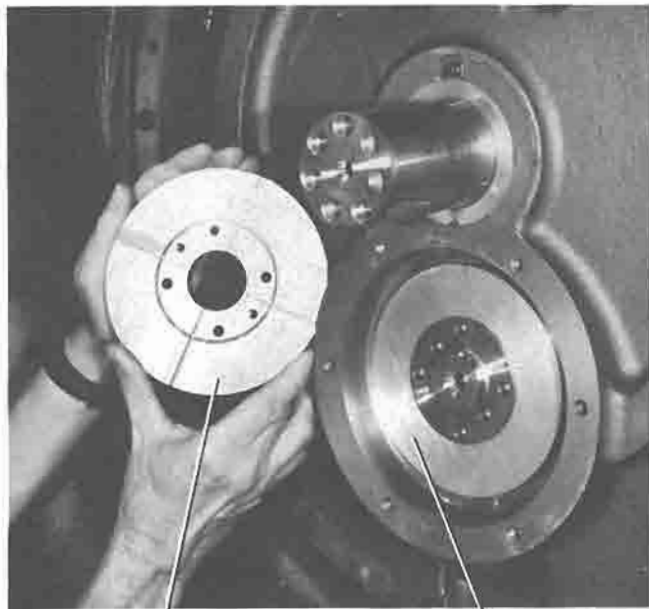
CHECKING LOW-SPEED THRUST RUN-OUT - MAX. RUN-OUT = .001" T.I.R.
